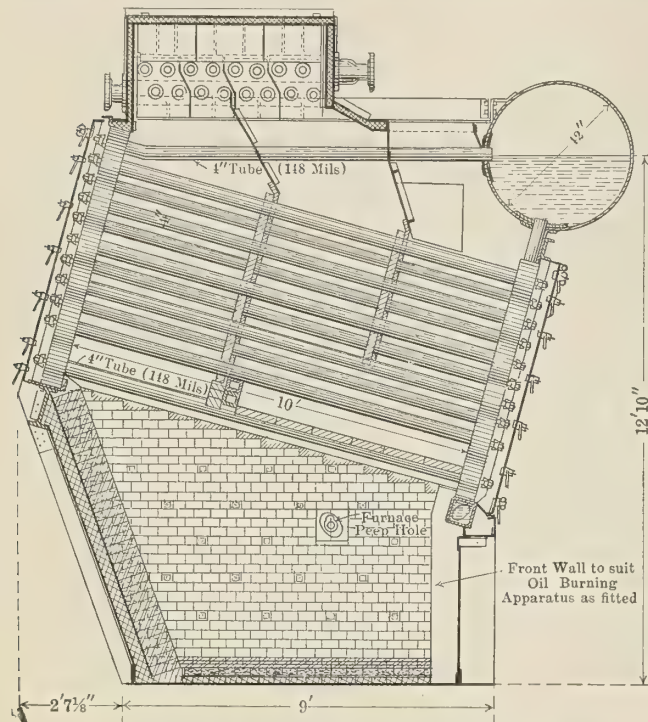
Section of Babcock & Wilcox Marine Type Boiler
